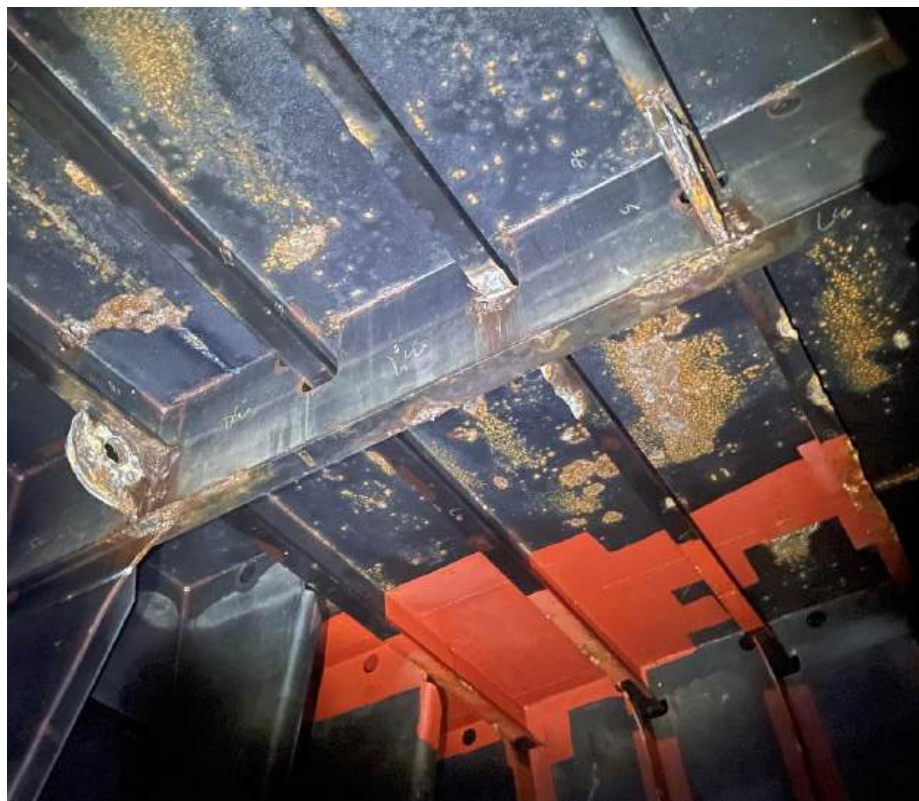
Tank 1 AFT-P (FR 212-215): These pontoon deck stiffeners are notching from the off-CL longitudinal WT BHD to the 1st longitudinal OTBD.
